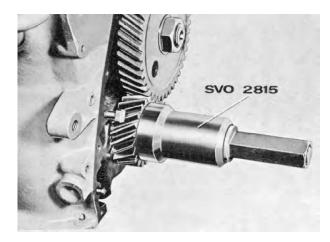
Fitting the crankshaft gear (6-cyl. engine)
